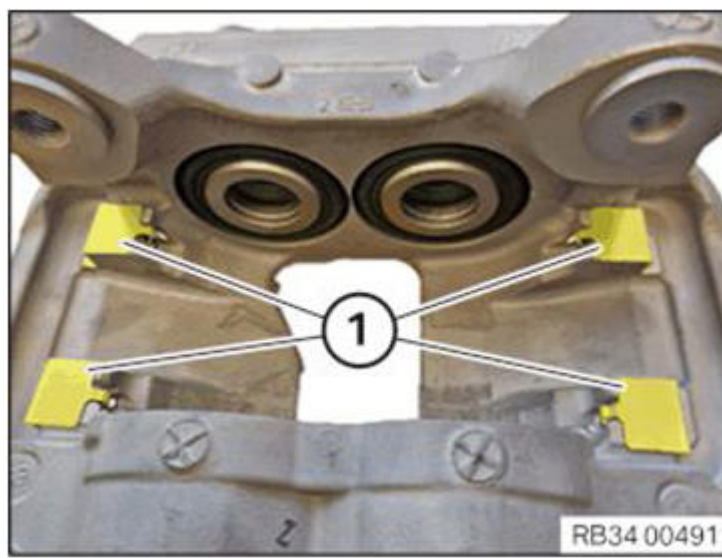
Identifying Brake Piston Contact Surface And Dust Boots
